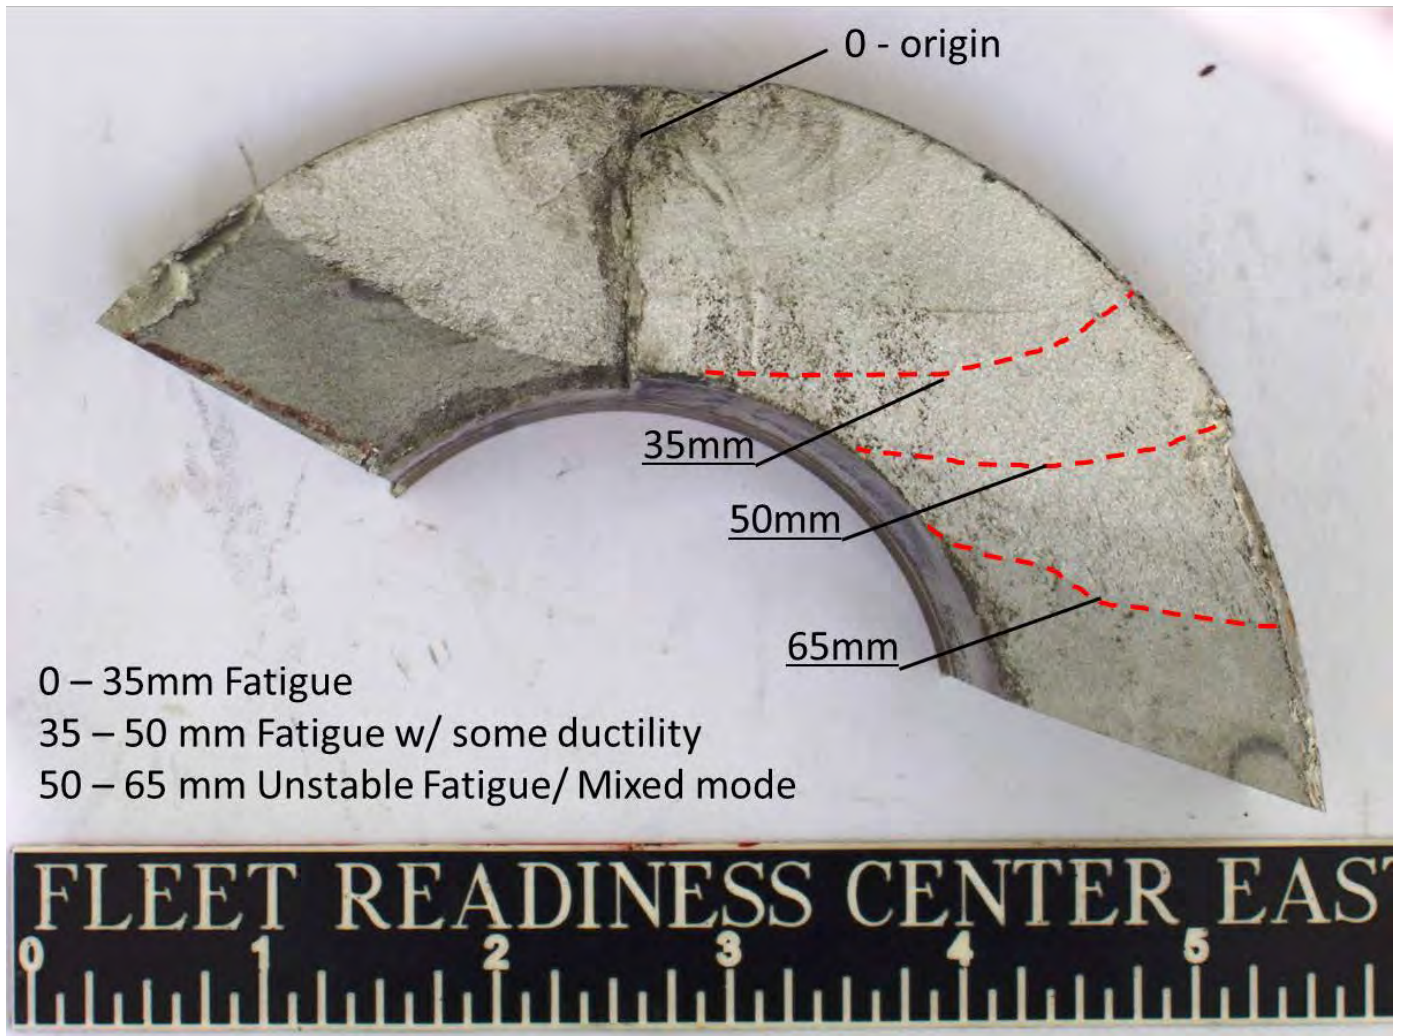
Fatigue Fracture Surface. From 0-35mm only fatigue fracture observed. 35-50mm ductility (overload) began to present. 50-65mm was mixed mode fracture with some fatigue within overload fracture.
